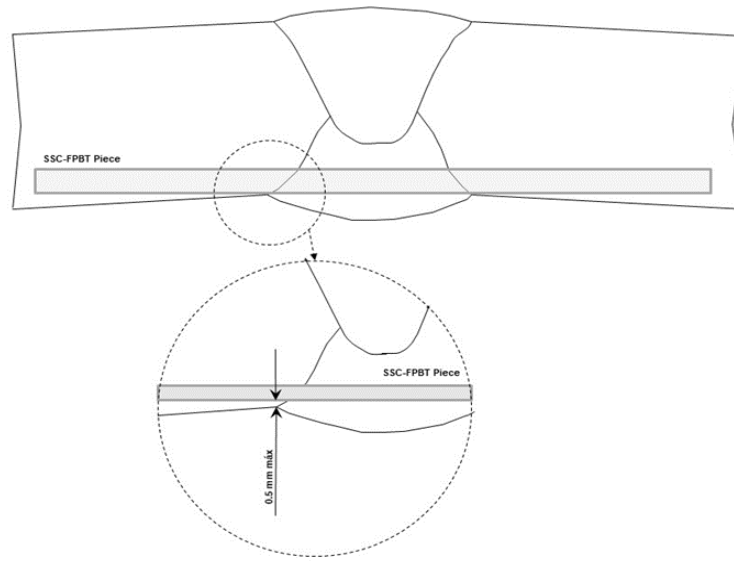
Sampling Locations of SAW Weld SSC Specimens
